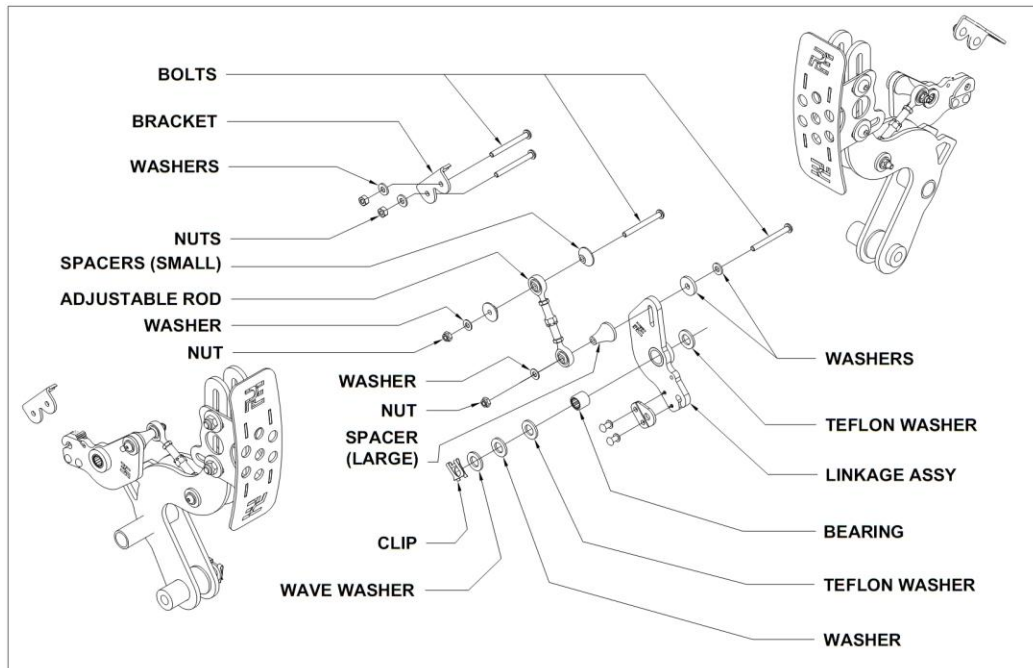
Throttle Cable Parts (PE-001-1001 & PE-003-1001)
